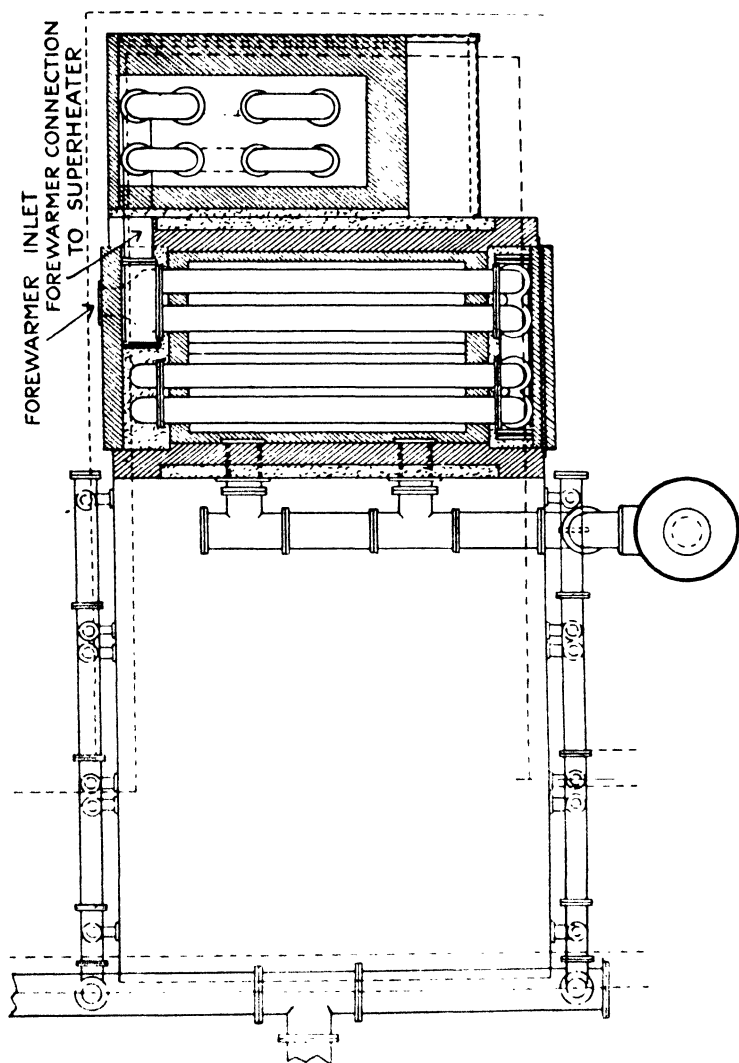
Horizontal Section through "Forewarmer" and Superheater (Lump Burners).
